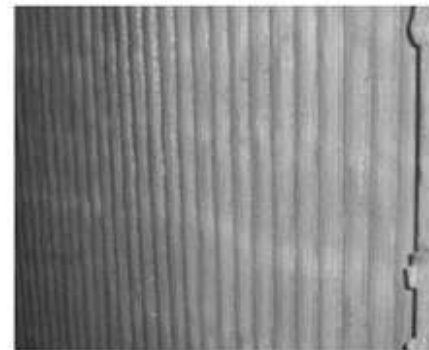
General view of an overlaid waterwall with alloy 625 overlay in a WTE boiler. Courtesy of Welding Services Inc.
